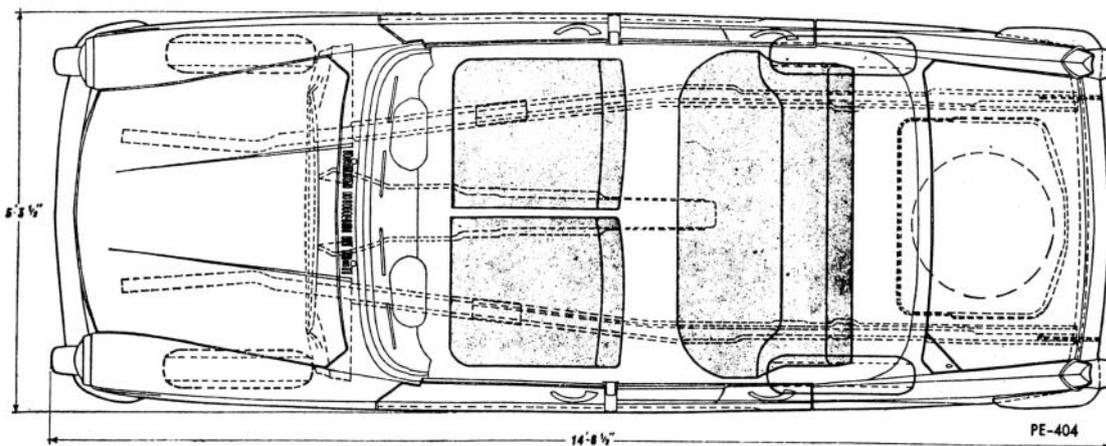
BMC ADO.38, plan view, typical (Austin shown)
